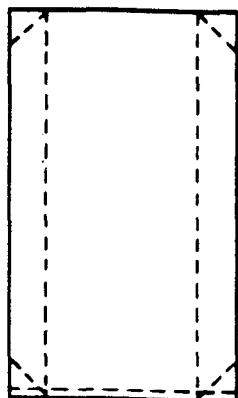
Open-mouth heat sealed gusseted sack with corner seals
